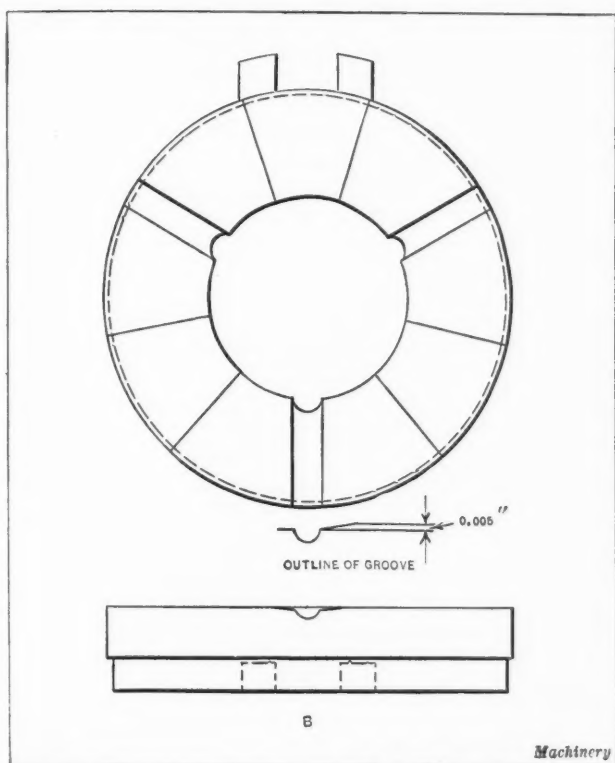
Thrust Washer used in Bearing shown in Fig. 1
